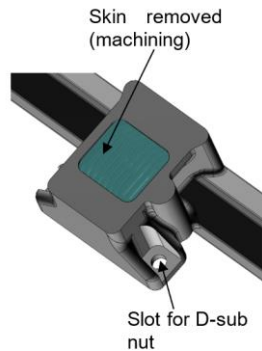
Bottom view of the feedthrough after machining of the bottom surface and milling of the D-Sub nut slots.
